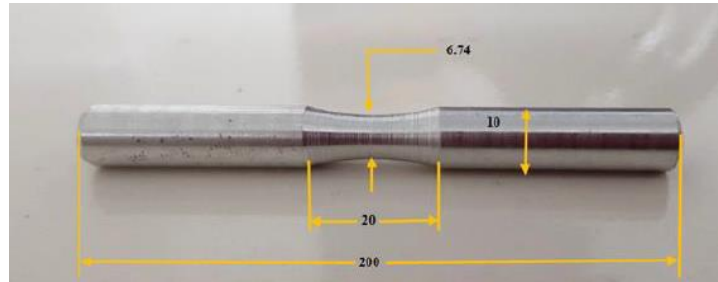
Specimen fatigue dimensions according to DIN (50113)
